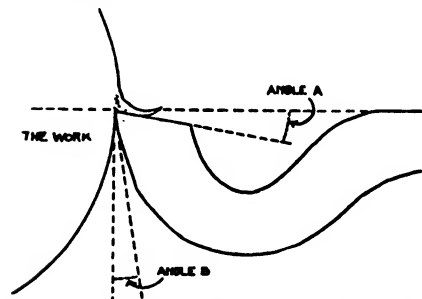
A ROUGHING TOOL FOR HARD METAL
